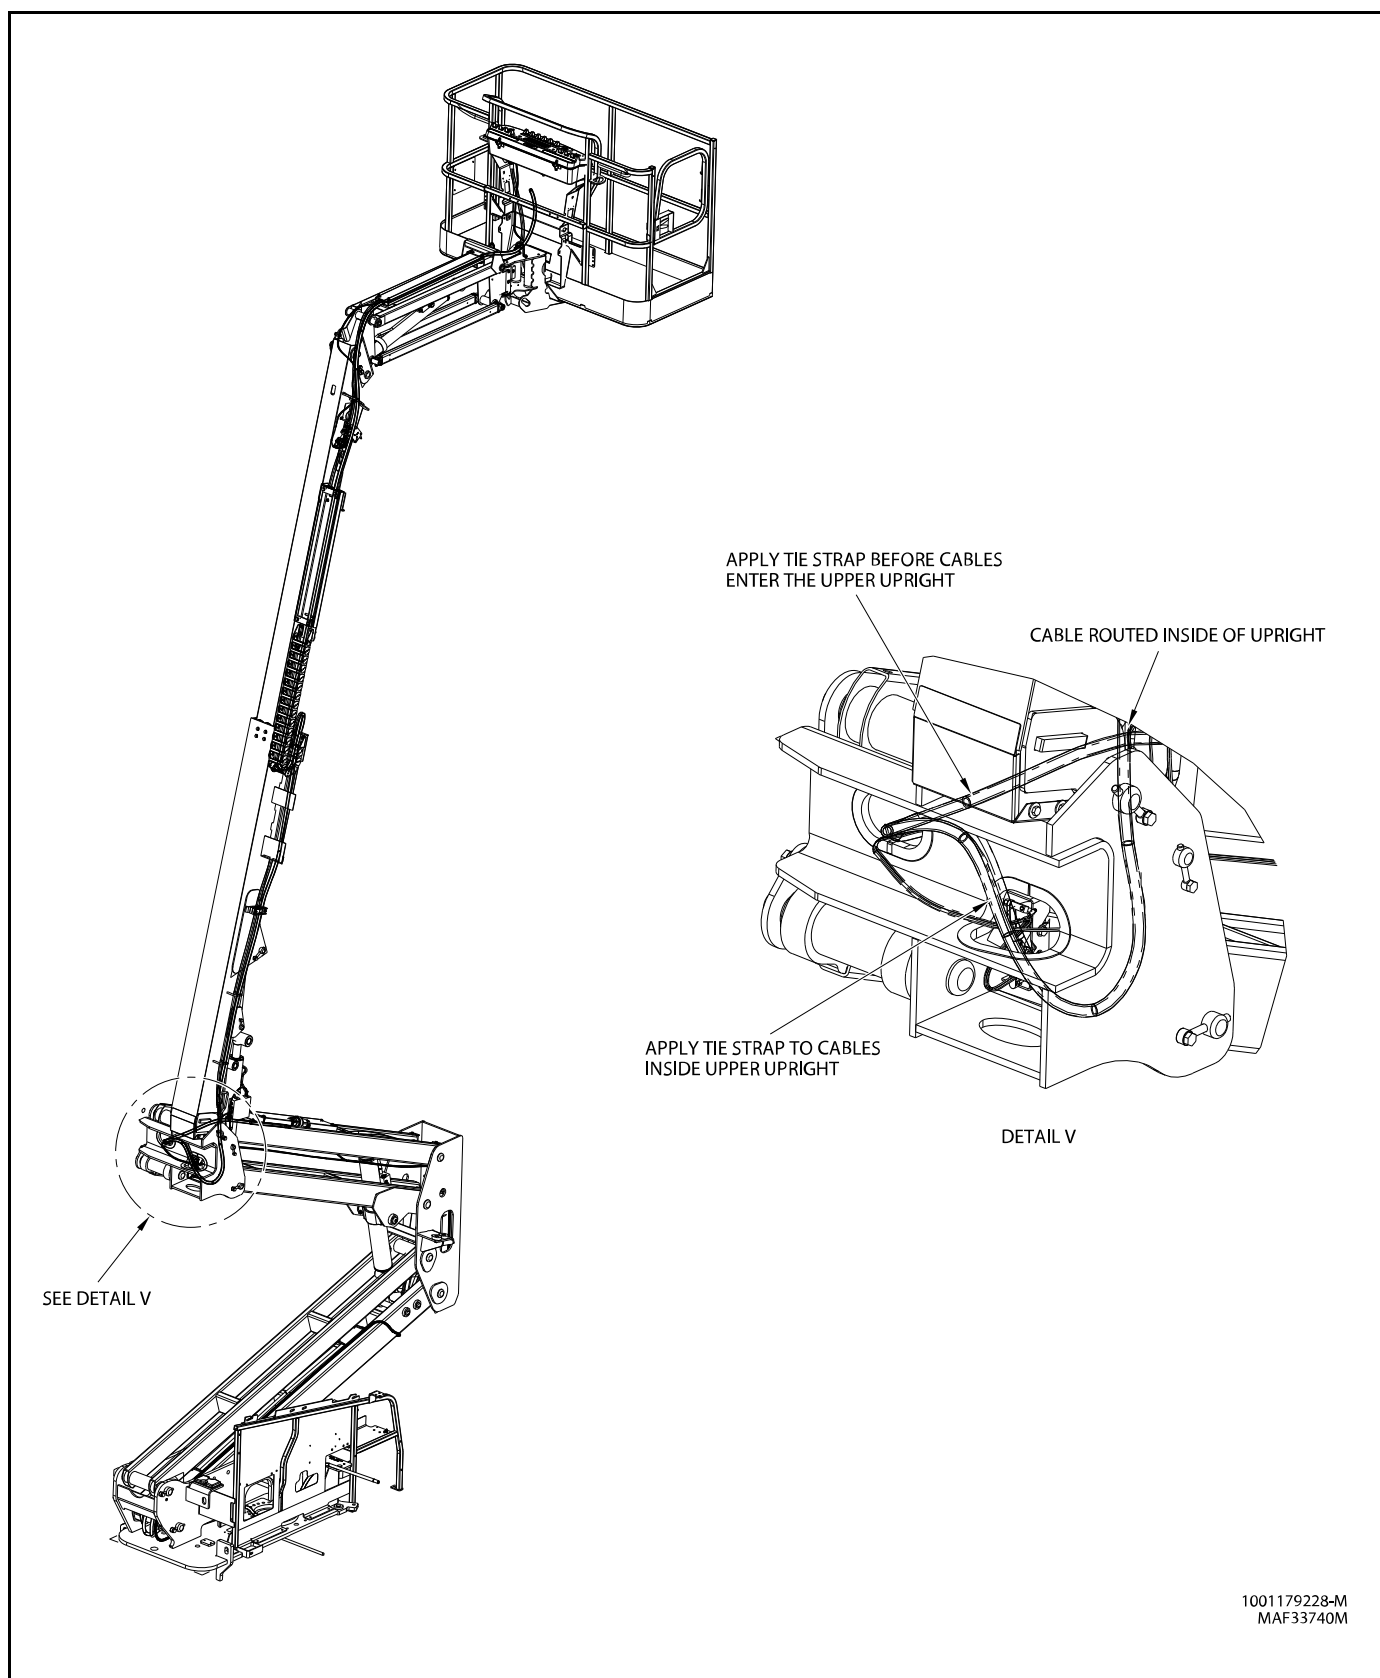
Cables and Clamps Installation - Sheet 7 of 8
